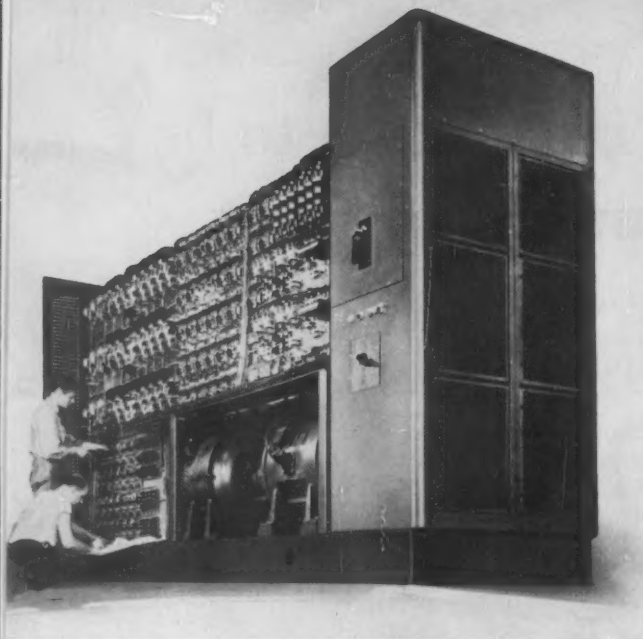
Grouped in this cabinet are the electrical controls for the twenty-four motors which deliver 300 H.P. to a single milling machine.
